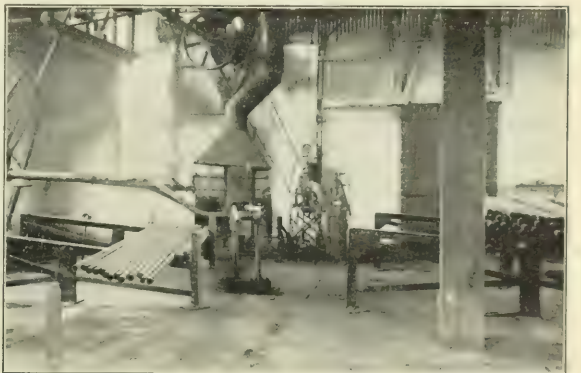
Flue Shop. Furnace, Swedging and Welding Machines.
